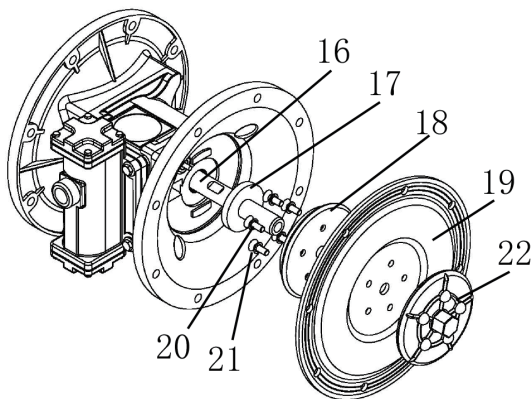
Disassembly of Diaphragm Assembly
